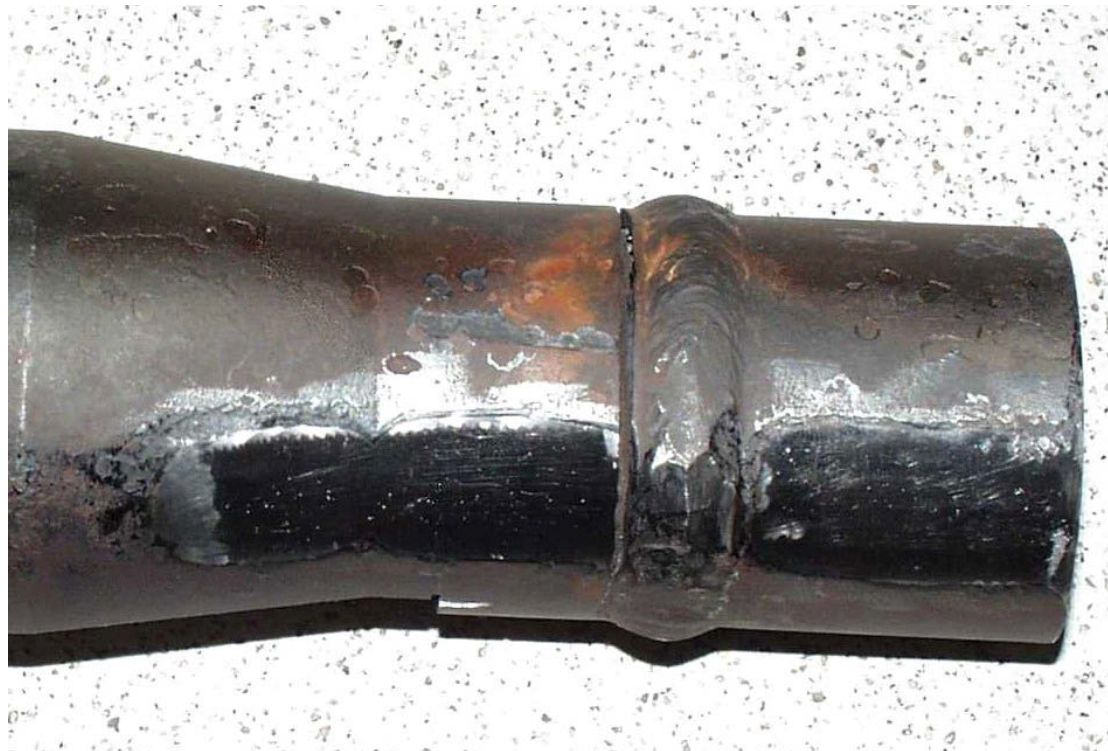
Type IV cracking on the F91 side of a weld between an F91 forged transition bottle and a T91 tube (48 mm OD) taken from Ref. [2].
